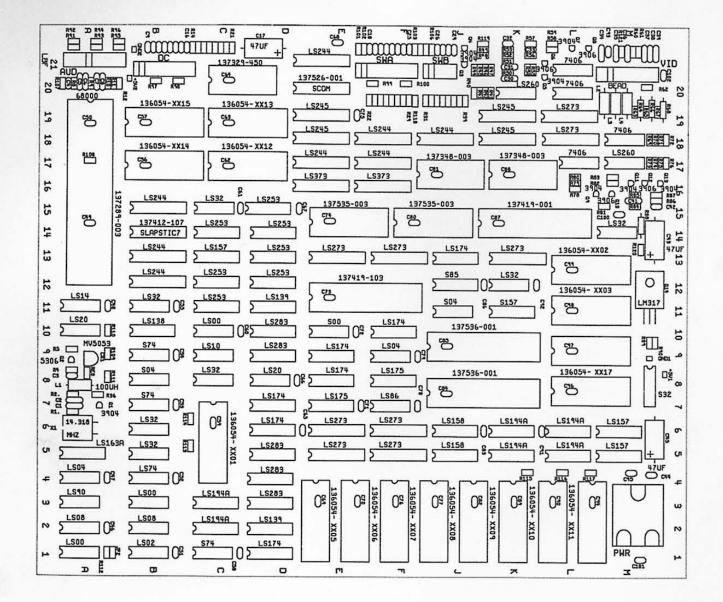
Xybots Game PCB Assembly A044423-21 B
